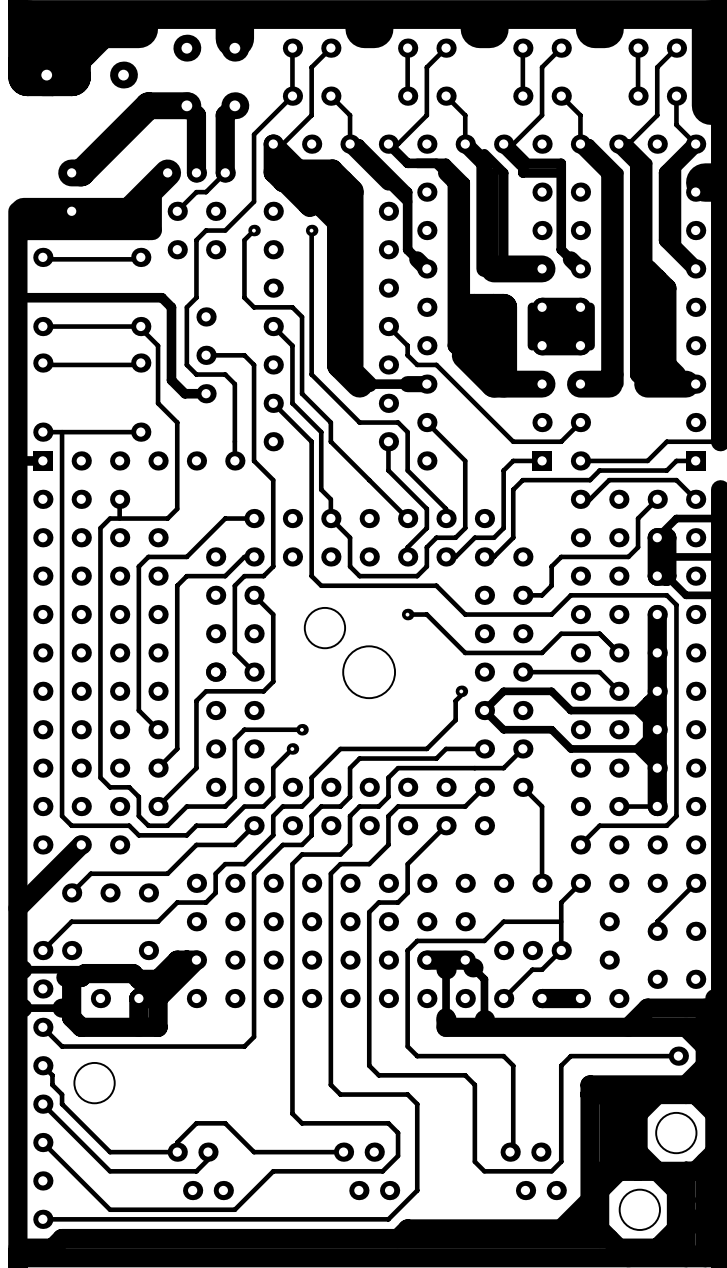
Mini Board 2.0, Component Side, 2:1 Enlargement
